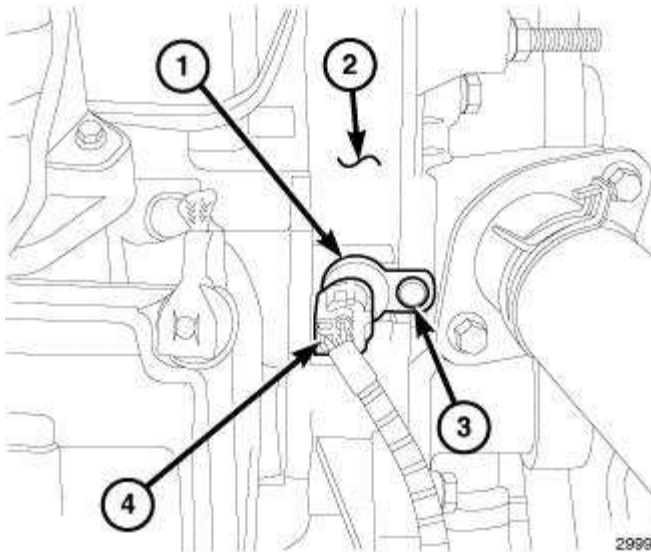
CAMSHAFT POSITION SENSOR-5.7L
